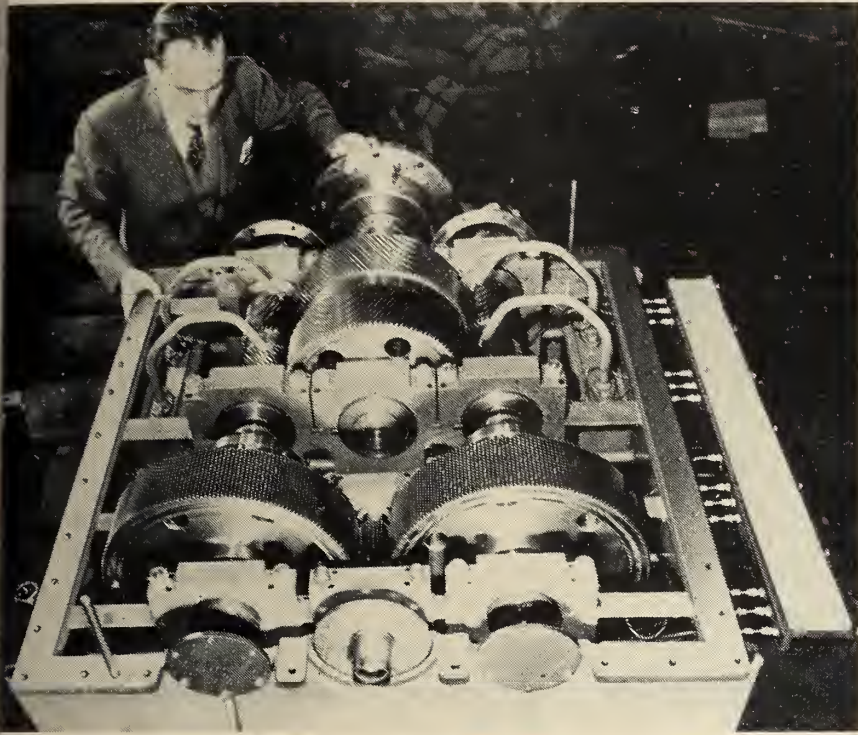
The gearbox viewed from high-speed end with top cover removed.
